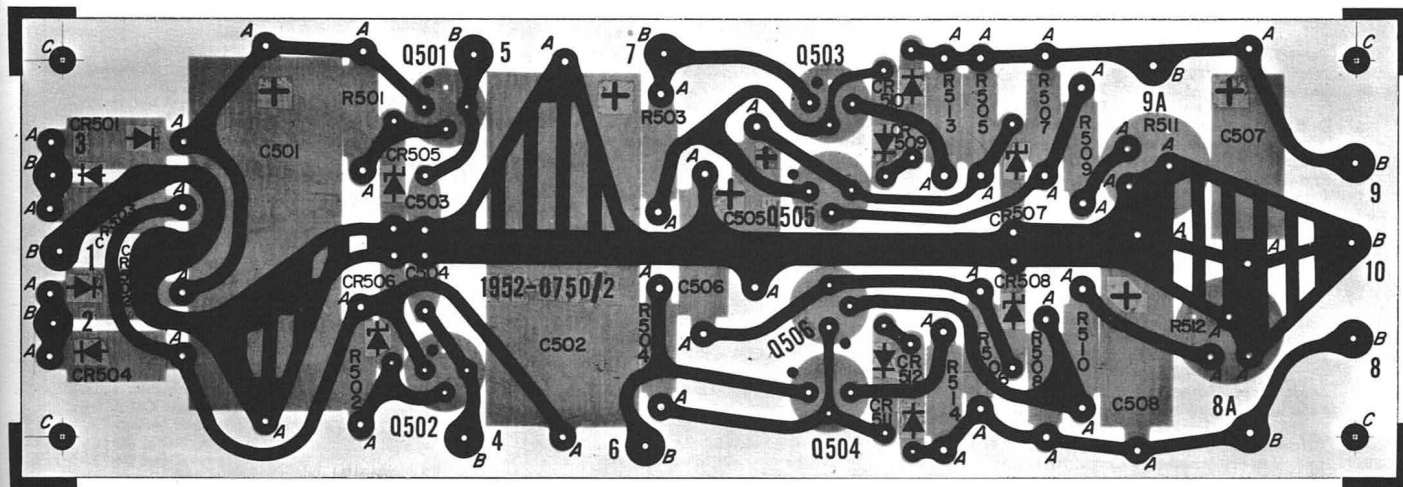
Etched Circuit Board Assembly, Power Supply (P/N 1952-2750).
